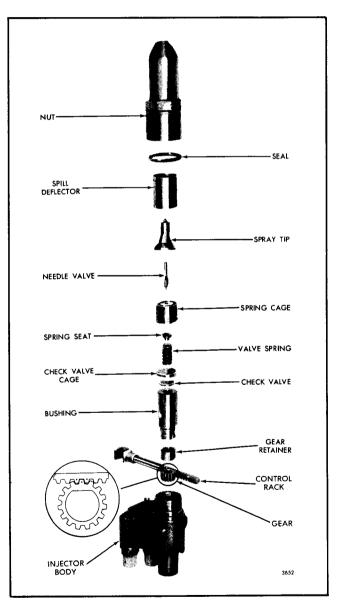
Injector Rack, Gear, Spray Tip and Valve Assembly Details and Relative Location of Parts
